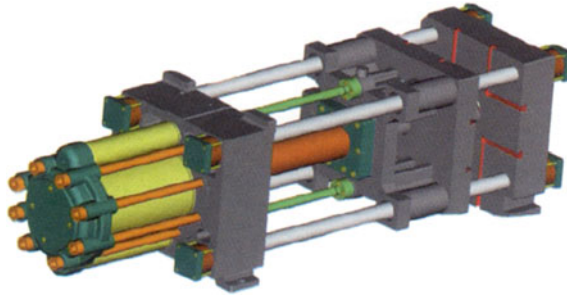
Hydraulic drive (Reproduced from Eurecat)
